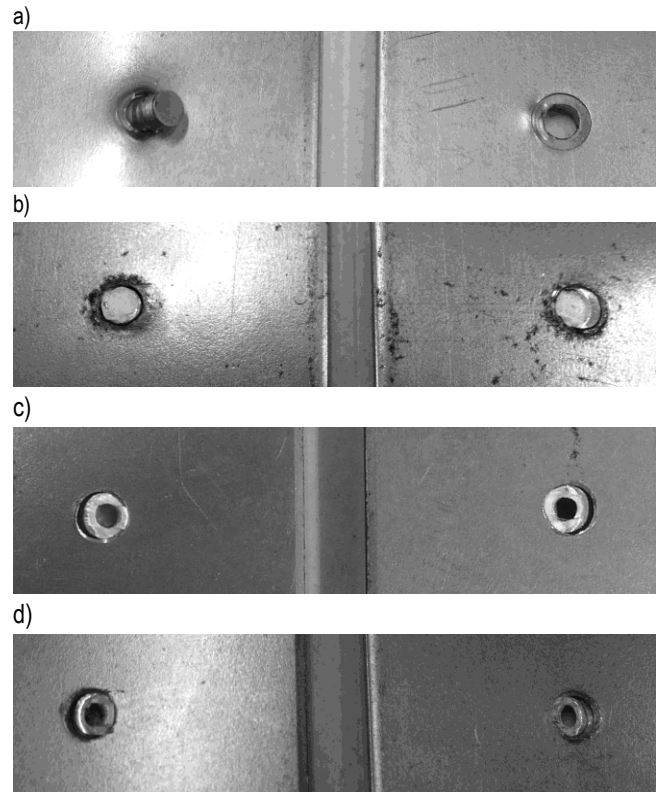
Sheet metal surfaces after the tensile shear testing. Lap joints (DC01 sheet material) with: a) solid self-piercing steel rivet, b) aluminium alloy rivet for closing up, c) aluminium-steel blind hermetic rivet, d) aluminium-steel blind rivet
